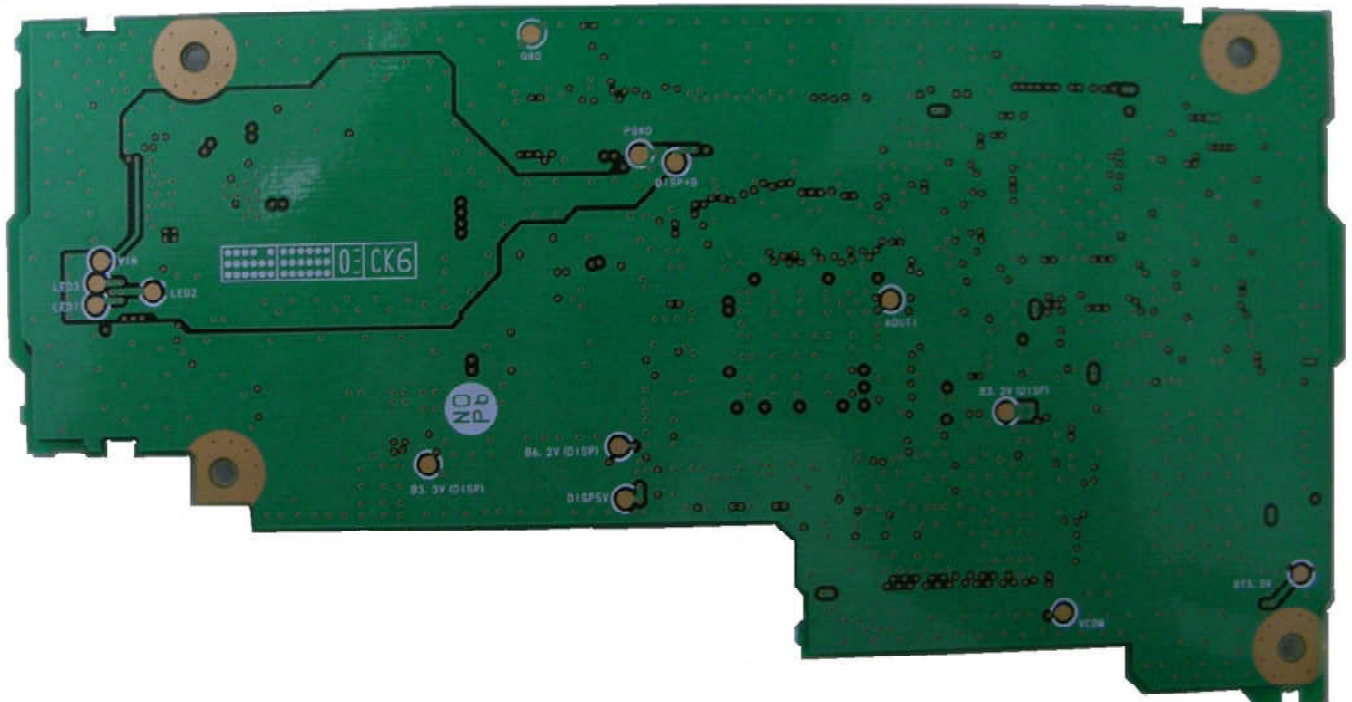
Appearance of PCB including Bluetooth IC (Solder Side)
